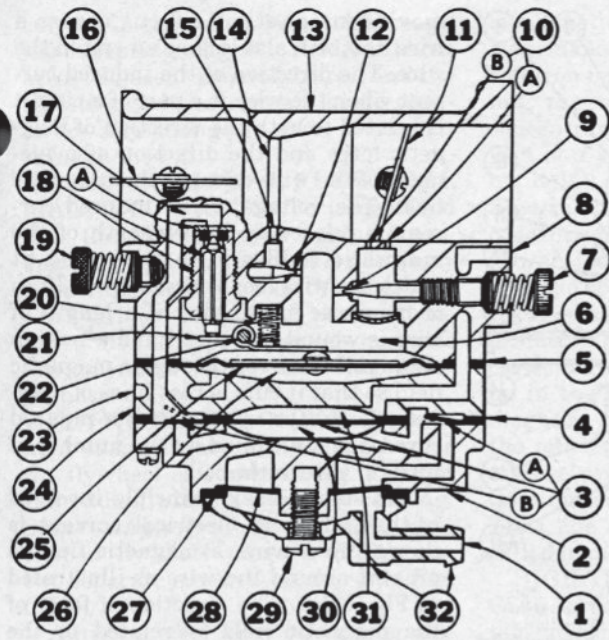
Cross-sectional schematic view of Tillotson series HL diaphragm carburetor. Some models of this type carburetor are equipped with an accelerator pump.
